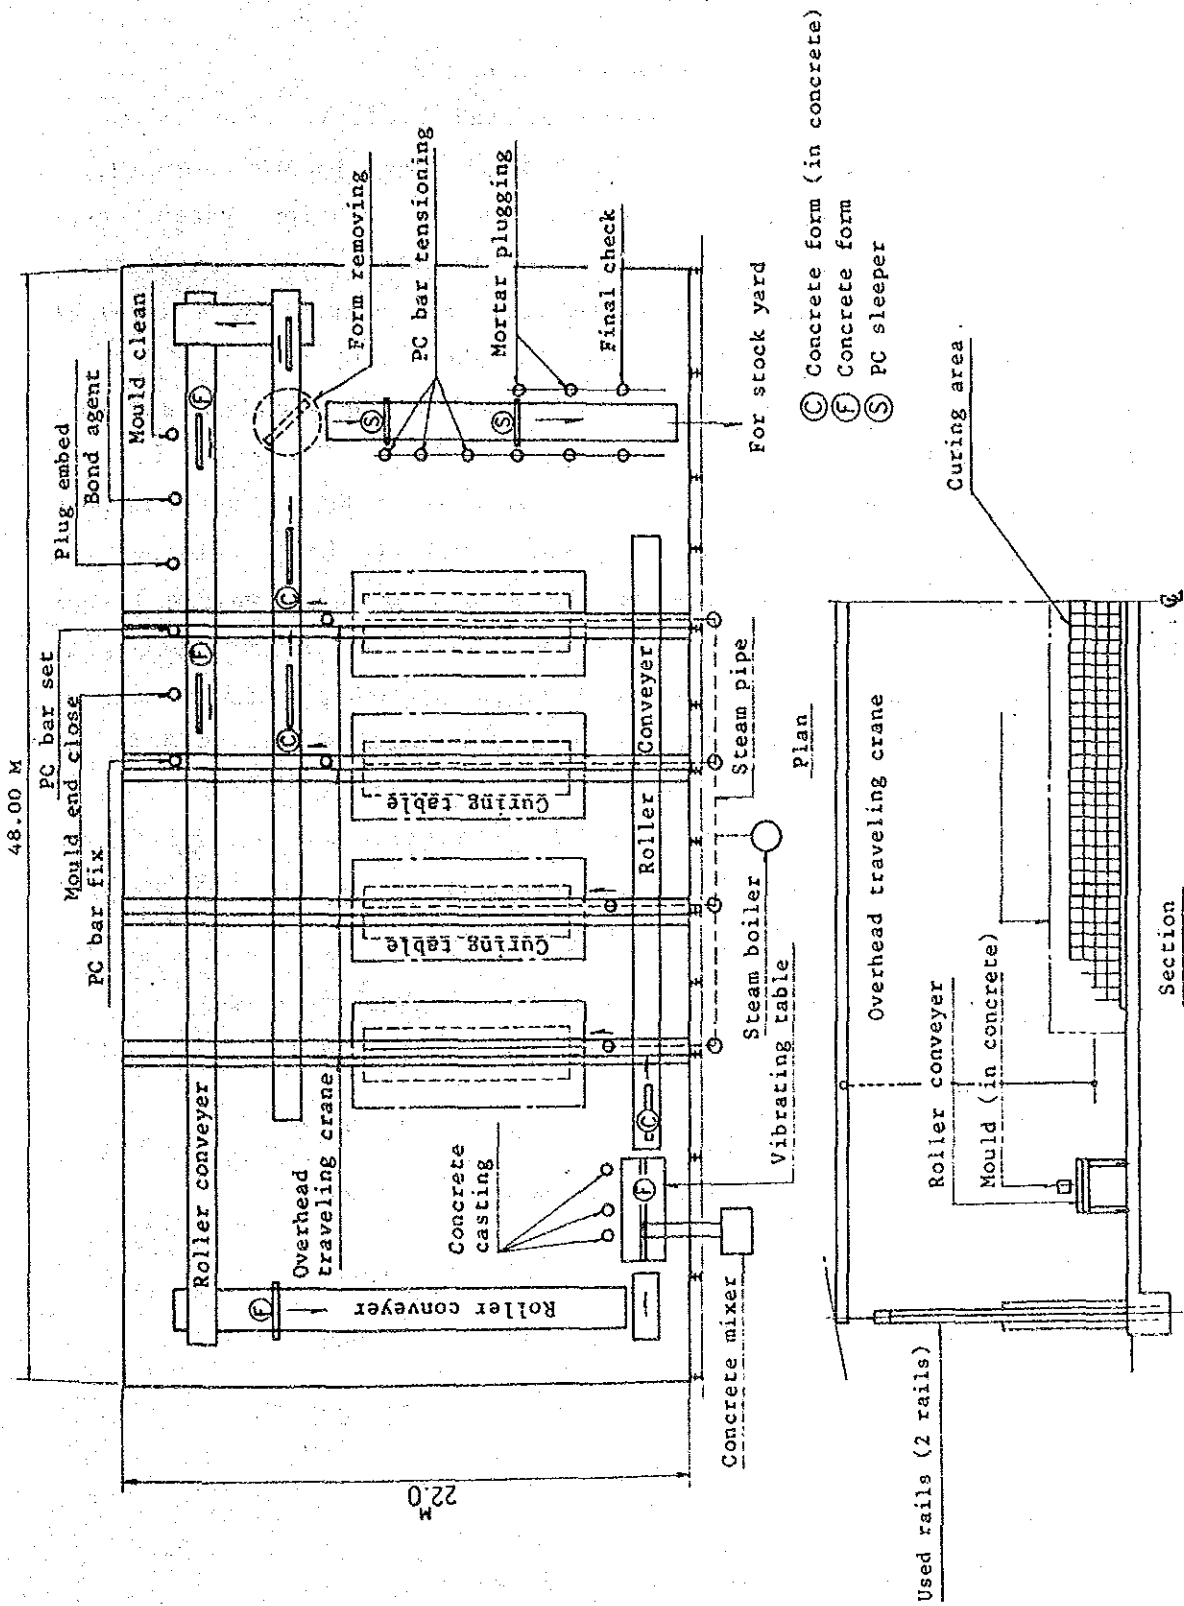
Typical PC Concrete Sleeper Factory (Post-tension) Layout
